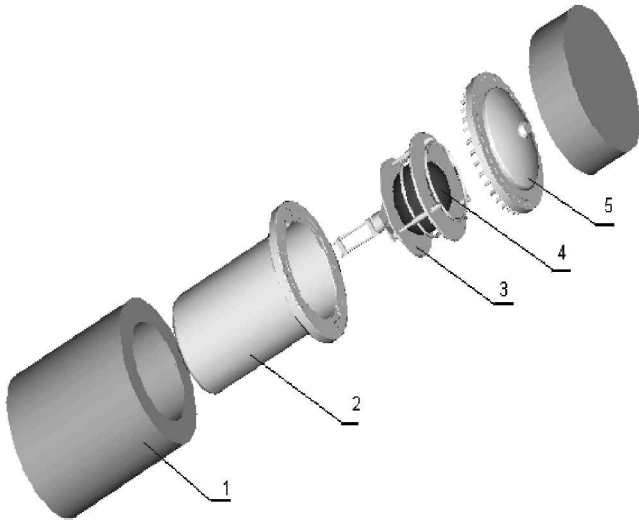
Exploded view of the ALR8(SI) storage container components.
